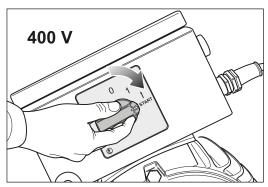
To switch on the machine turn the switch button at the motor to position -START-.
